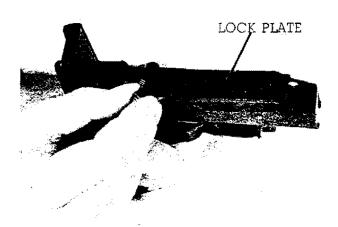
PUSHING THE LOCK PLATE FORWARD
